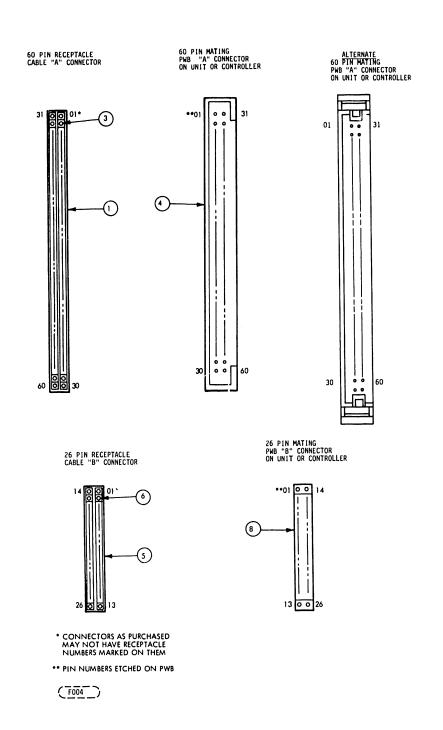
I/O CONNECTORS - CABLE MOUNT AND PWB MOUNT
